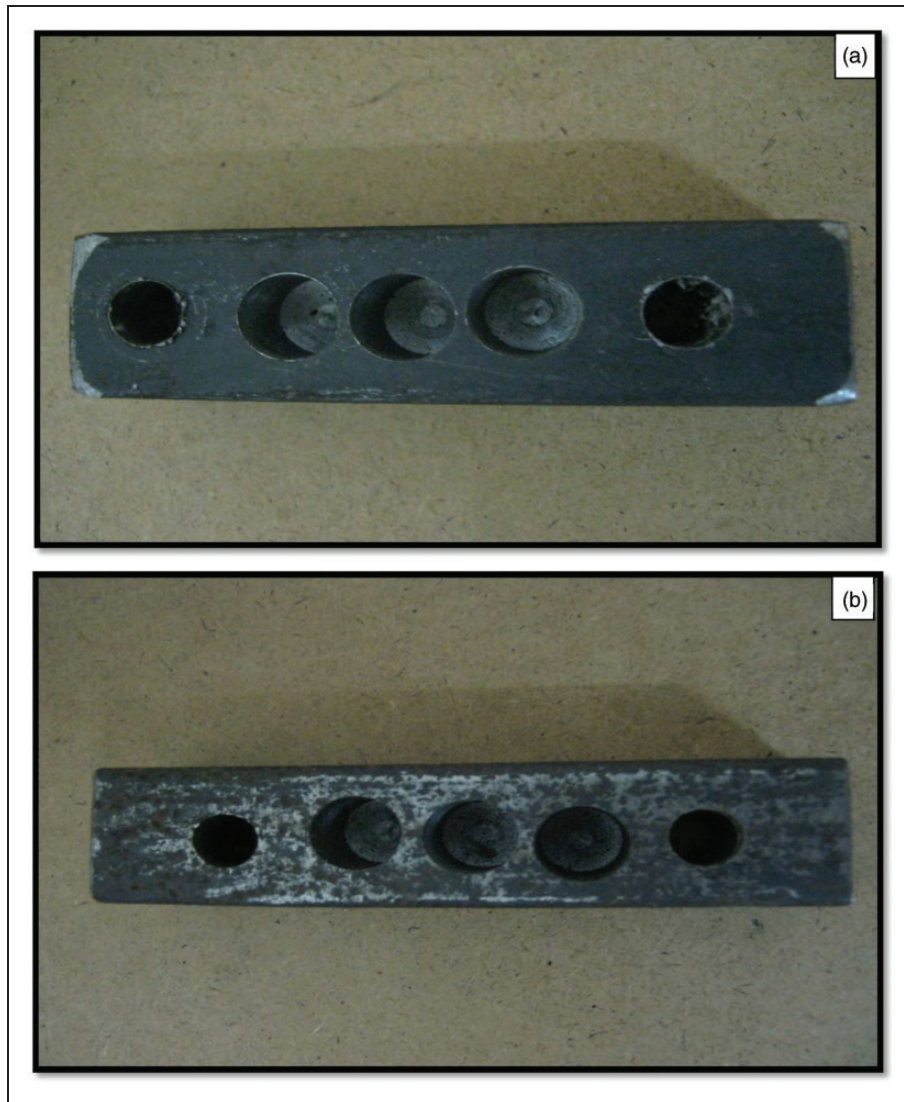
Drilled holes on: (a) AISI 1040; (b) mild steel with the self-lubricated drill tools.
